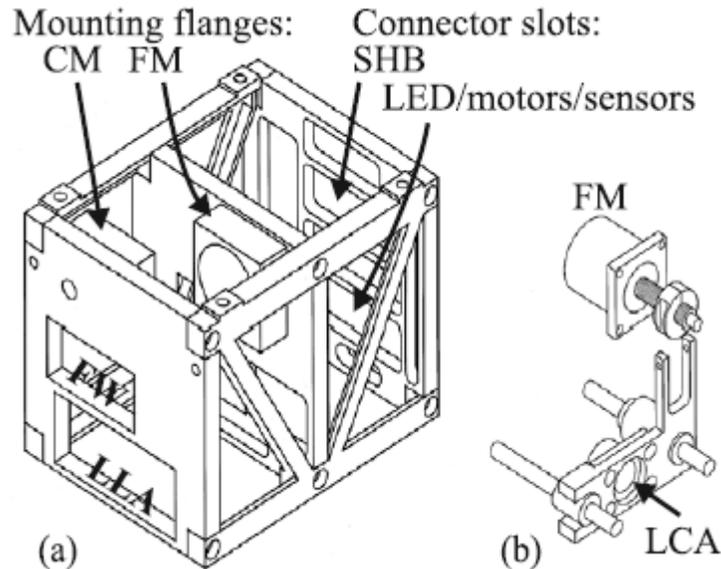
Optomechanical layout of the RAC. (a) The RAC frame and optical bench, including mounting slots for the front window (FW) and lower lamp assembly (LLA). The frame houses the CCD, cover motor (CM), focus motor (FM), and lens cell assembly (LCA). (b) The focusing mechanism.
